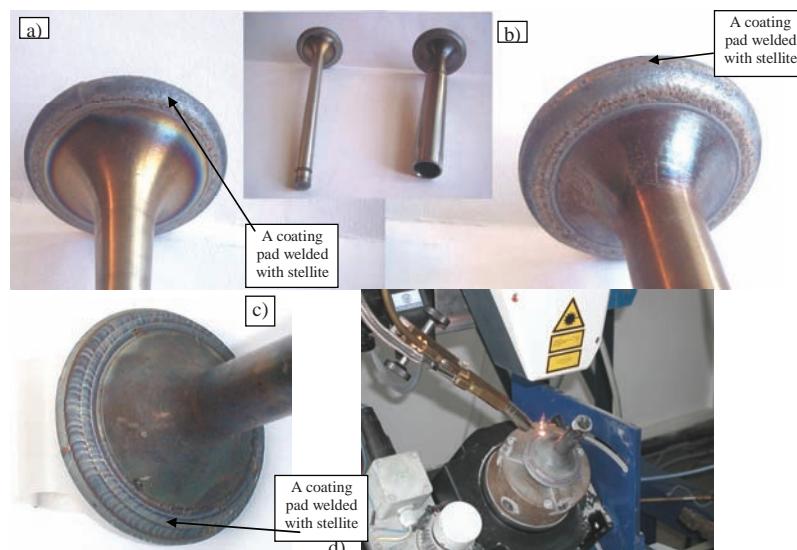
A combustion engine valve with a valve face that was laser pad welded with stellite: a) - SW-680; b) - W46; c) – ASz 62, d) - the pad welding process
